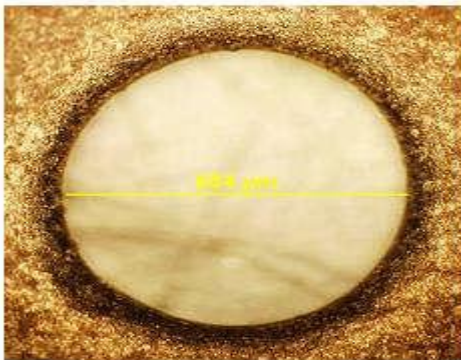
(c) Hole drilled on 100 μm thick CA-173 sheet at 50 KHz and 16 Vpp
